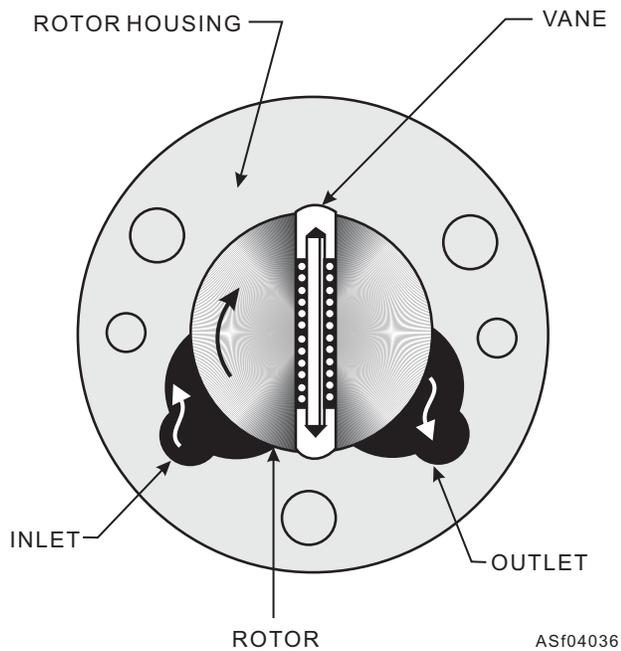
Vaness and rotor in housing of a vane-type fuel pump.
